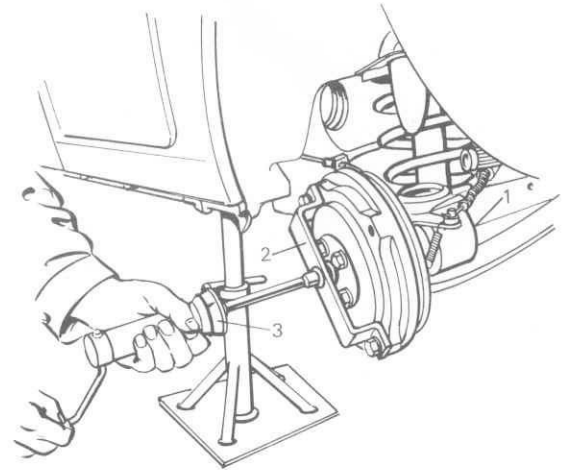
7 Checking the rolling torque of the rear axle shaft with drive disconnected. The axle shaft nut is 1, the tool 2 is part A.95697/2 and the dynamometer 3 is part A.95697
